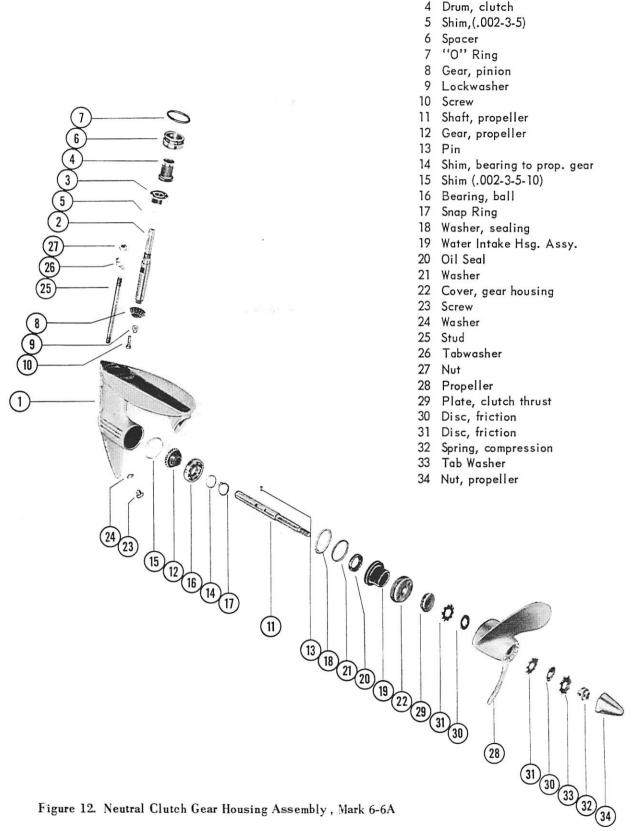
Neutral Clutch Gear Housing Assembly, Mark 6-6A
